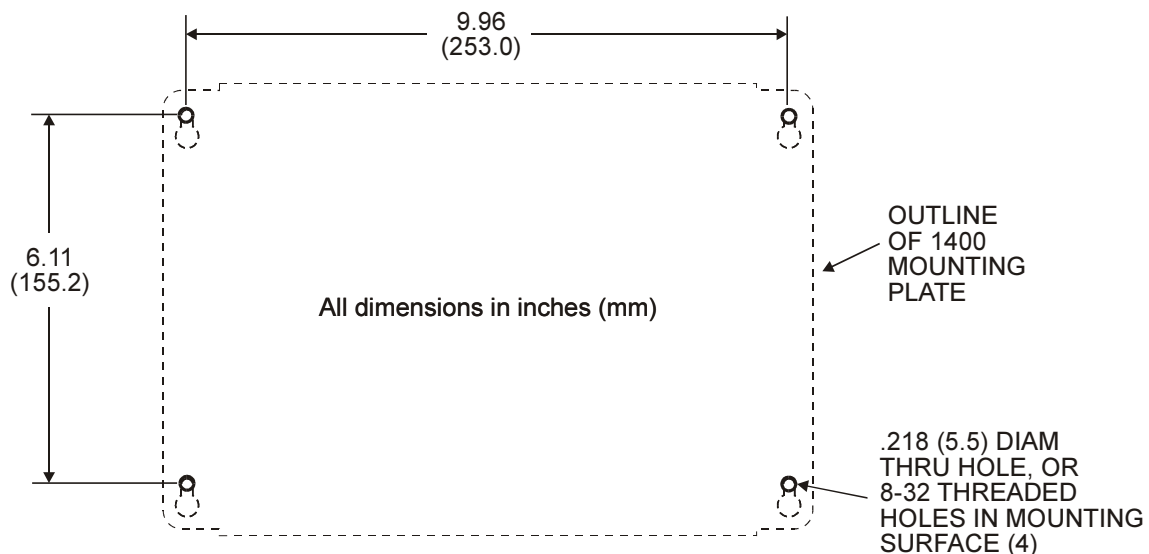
1400 Unit Mounting Dimensions using Nut and Bolt
